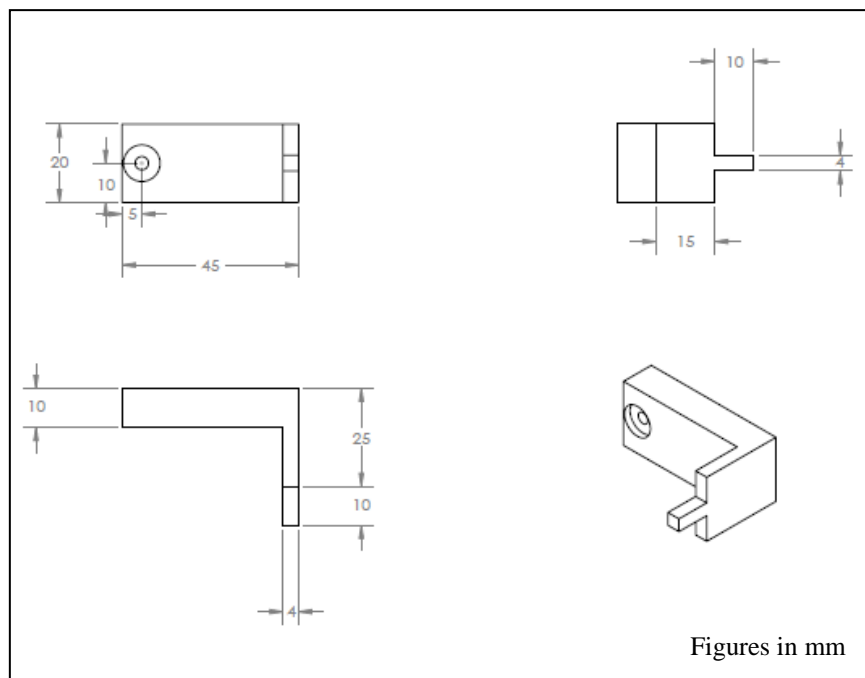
L-jig to bend the living hinge specimen in a radial path
